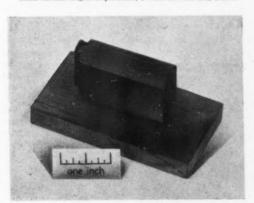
Plastics Knockout Block, Which Has Been Used in Place of a Similar Steel Part, for a Trimming Die Employed in the Production of Forgings for Turbine and Compressor Blades
